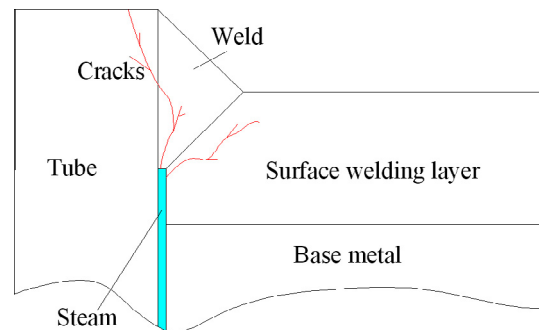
Diagram of the tube to tube-sheet joint zone.
